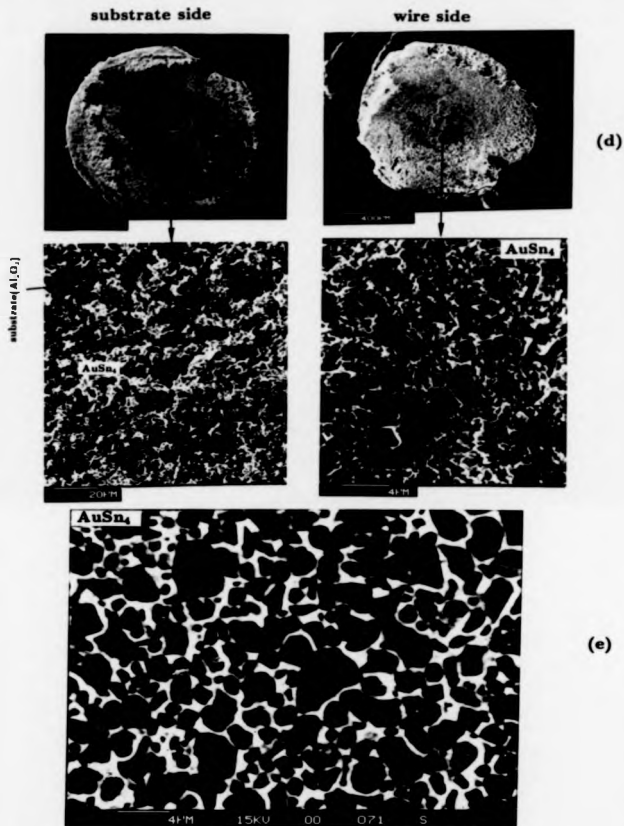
8. SEM micrographs of the fracture surfaces of a Au/62Sn36Pb2Ag joint pulled to fracture after aging at 125°C for (d) 1250 hours, (e) 7000 hours.
